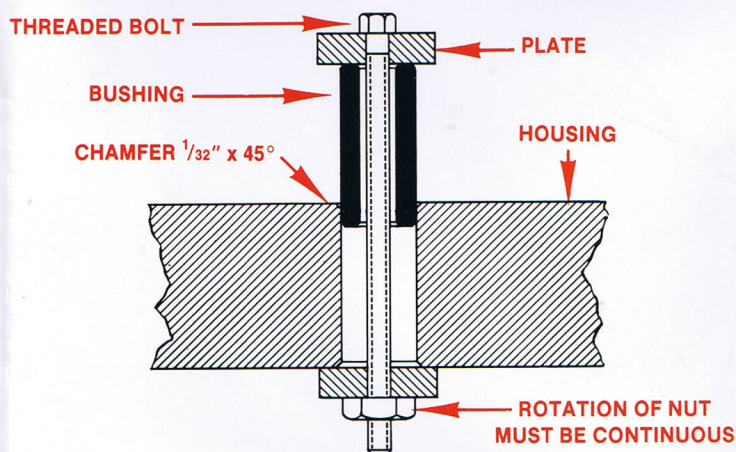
Bolt-and-Nut Method of Pressing GRAPHALLOY Bushing into Housing
